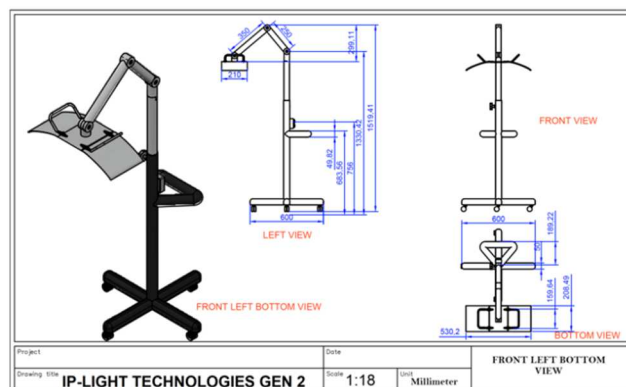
Front Left Bottom View of IP-Light Technologies Gen 2
